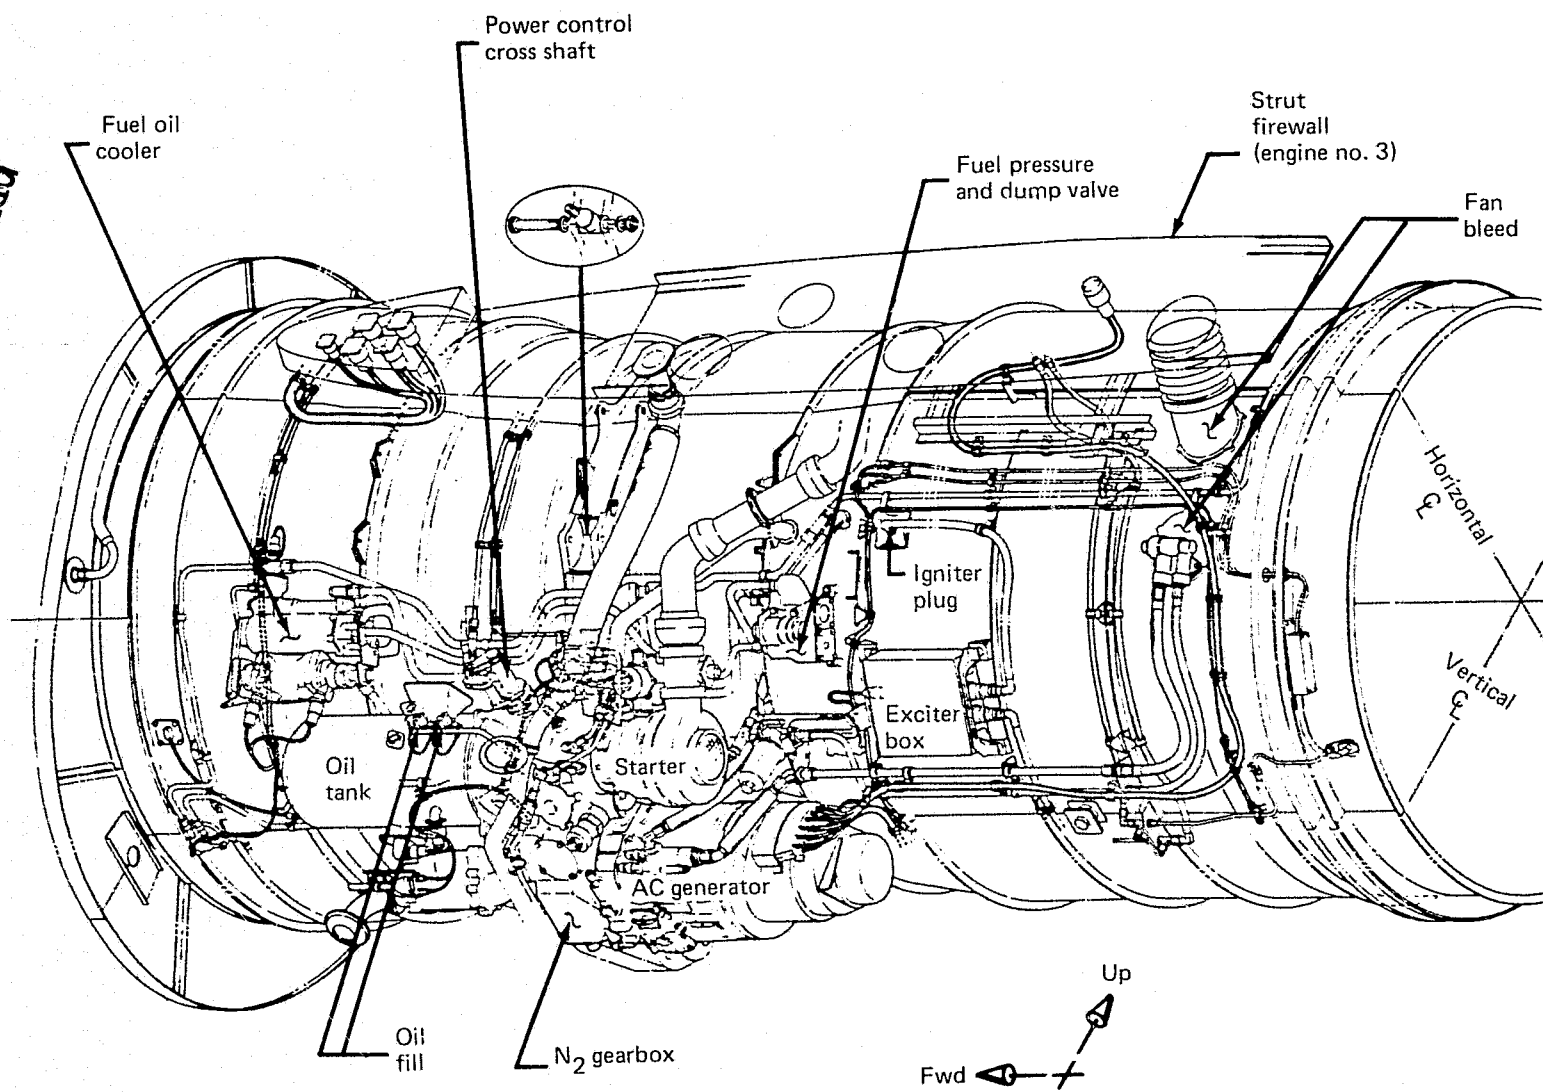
JT8D Refan Powerpack Assembly—Lower Left-Hand Side
